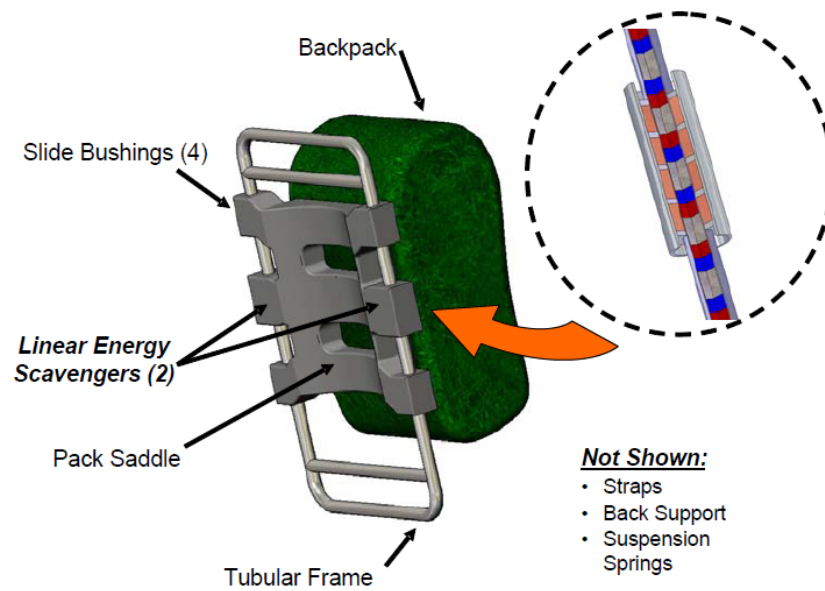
Suspended pack frame featuring magnetic stacks housed in tubular frame and stator coils enclosed in pack saddle
